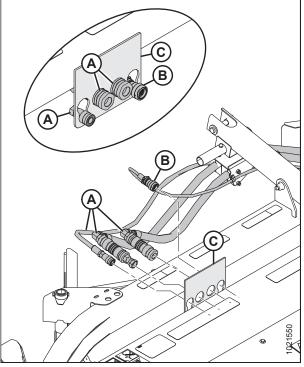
Hydraulic Storage Plate (Parts Removed for Clarity)
